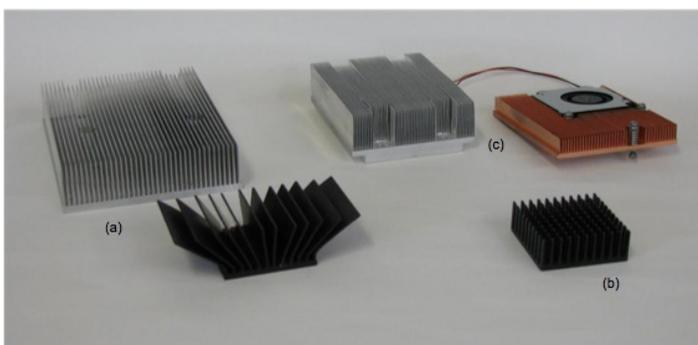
Some Heat Sink Manufacturing Technologies, Showing Extruded Heat Sinks (A), Forged Pin Fin (B) And Skived Aluminium And Copper Heat Sinks (C).
